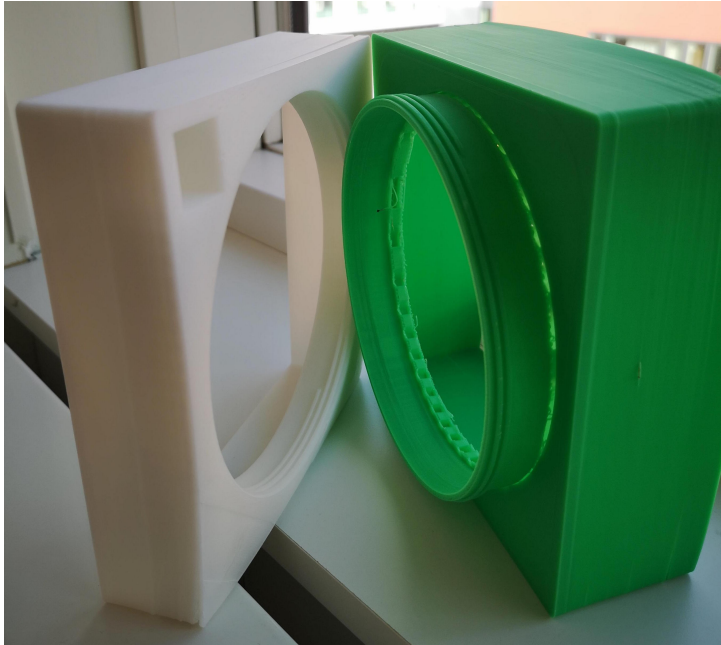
First 3D-printed prototype with screw threads, A1.
